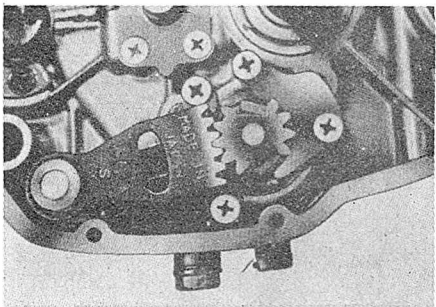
Installation of shift shaft in relation to shift drum gear set.
